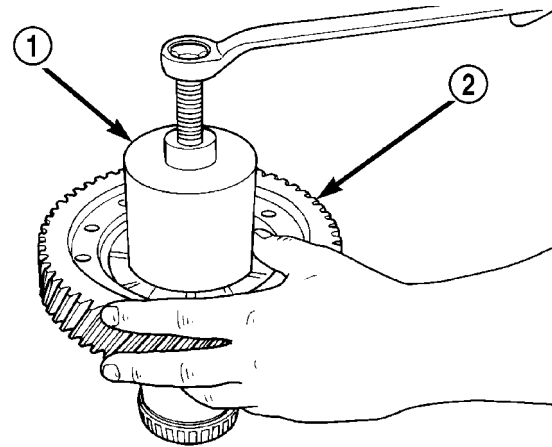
Remove Differential Bearing Cone (Ring Gear Side)
